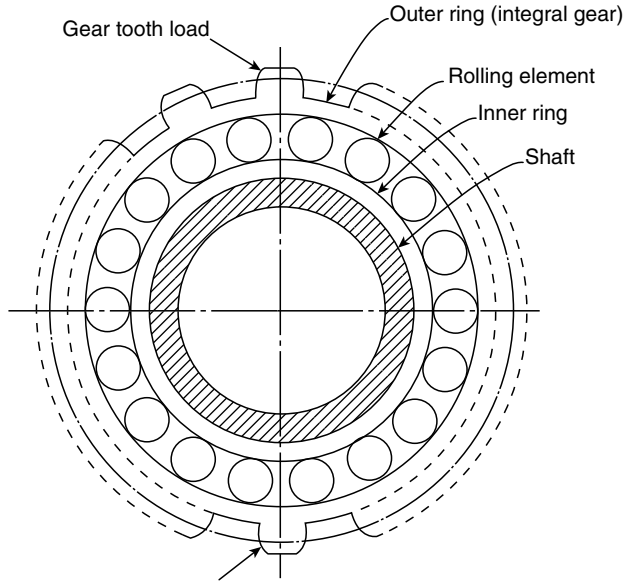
Planet gear bearing showing gear tooth loading.
